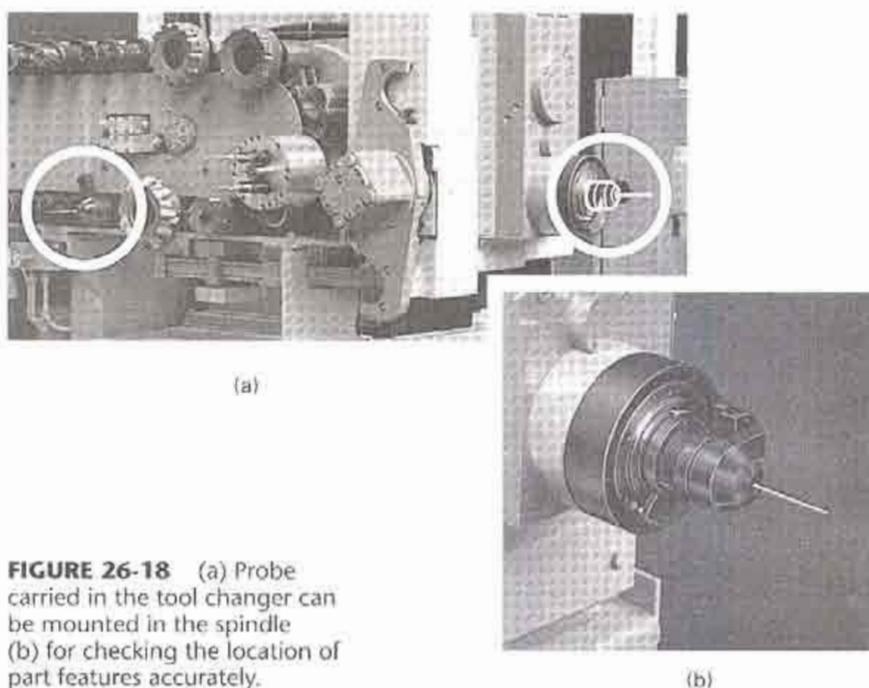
(a) Probe carried in the tool changer can be mounted in the spindle (b) for checking the location of part features accurately.
